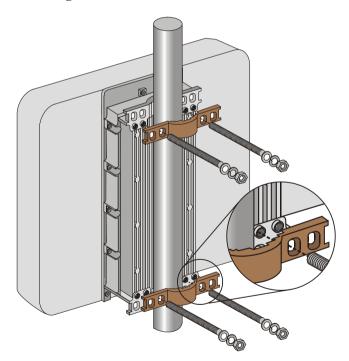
AU-RA 2" Pole Mounting Installation Using the Supplied Brackets
